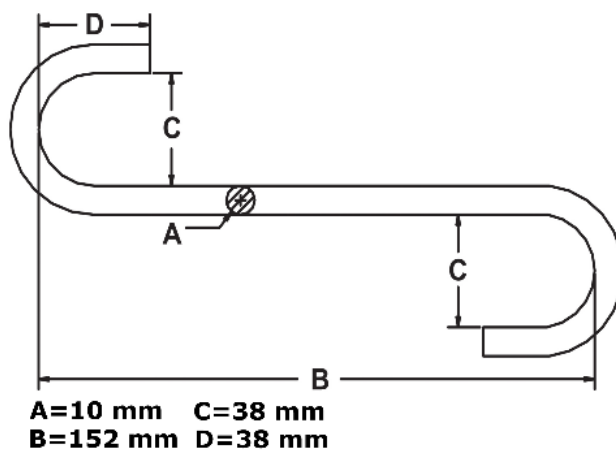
S-hook to connect rigging slings (Source: CMWORKS 2023).
